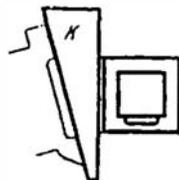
B. Use of an Intermediate Piece for Inclined Surfaces
